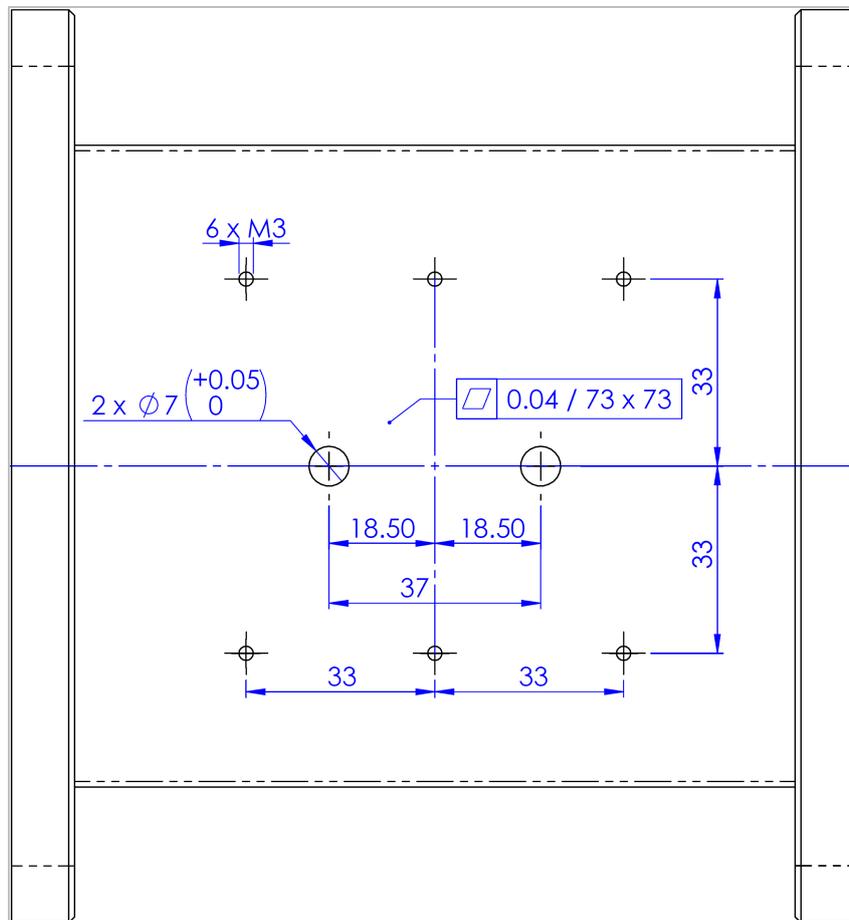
Basic BD132B/BD132BT dimensions in millimeters.
